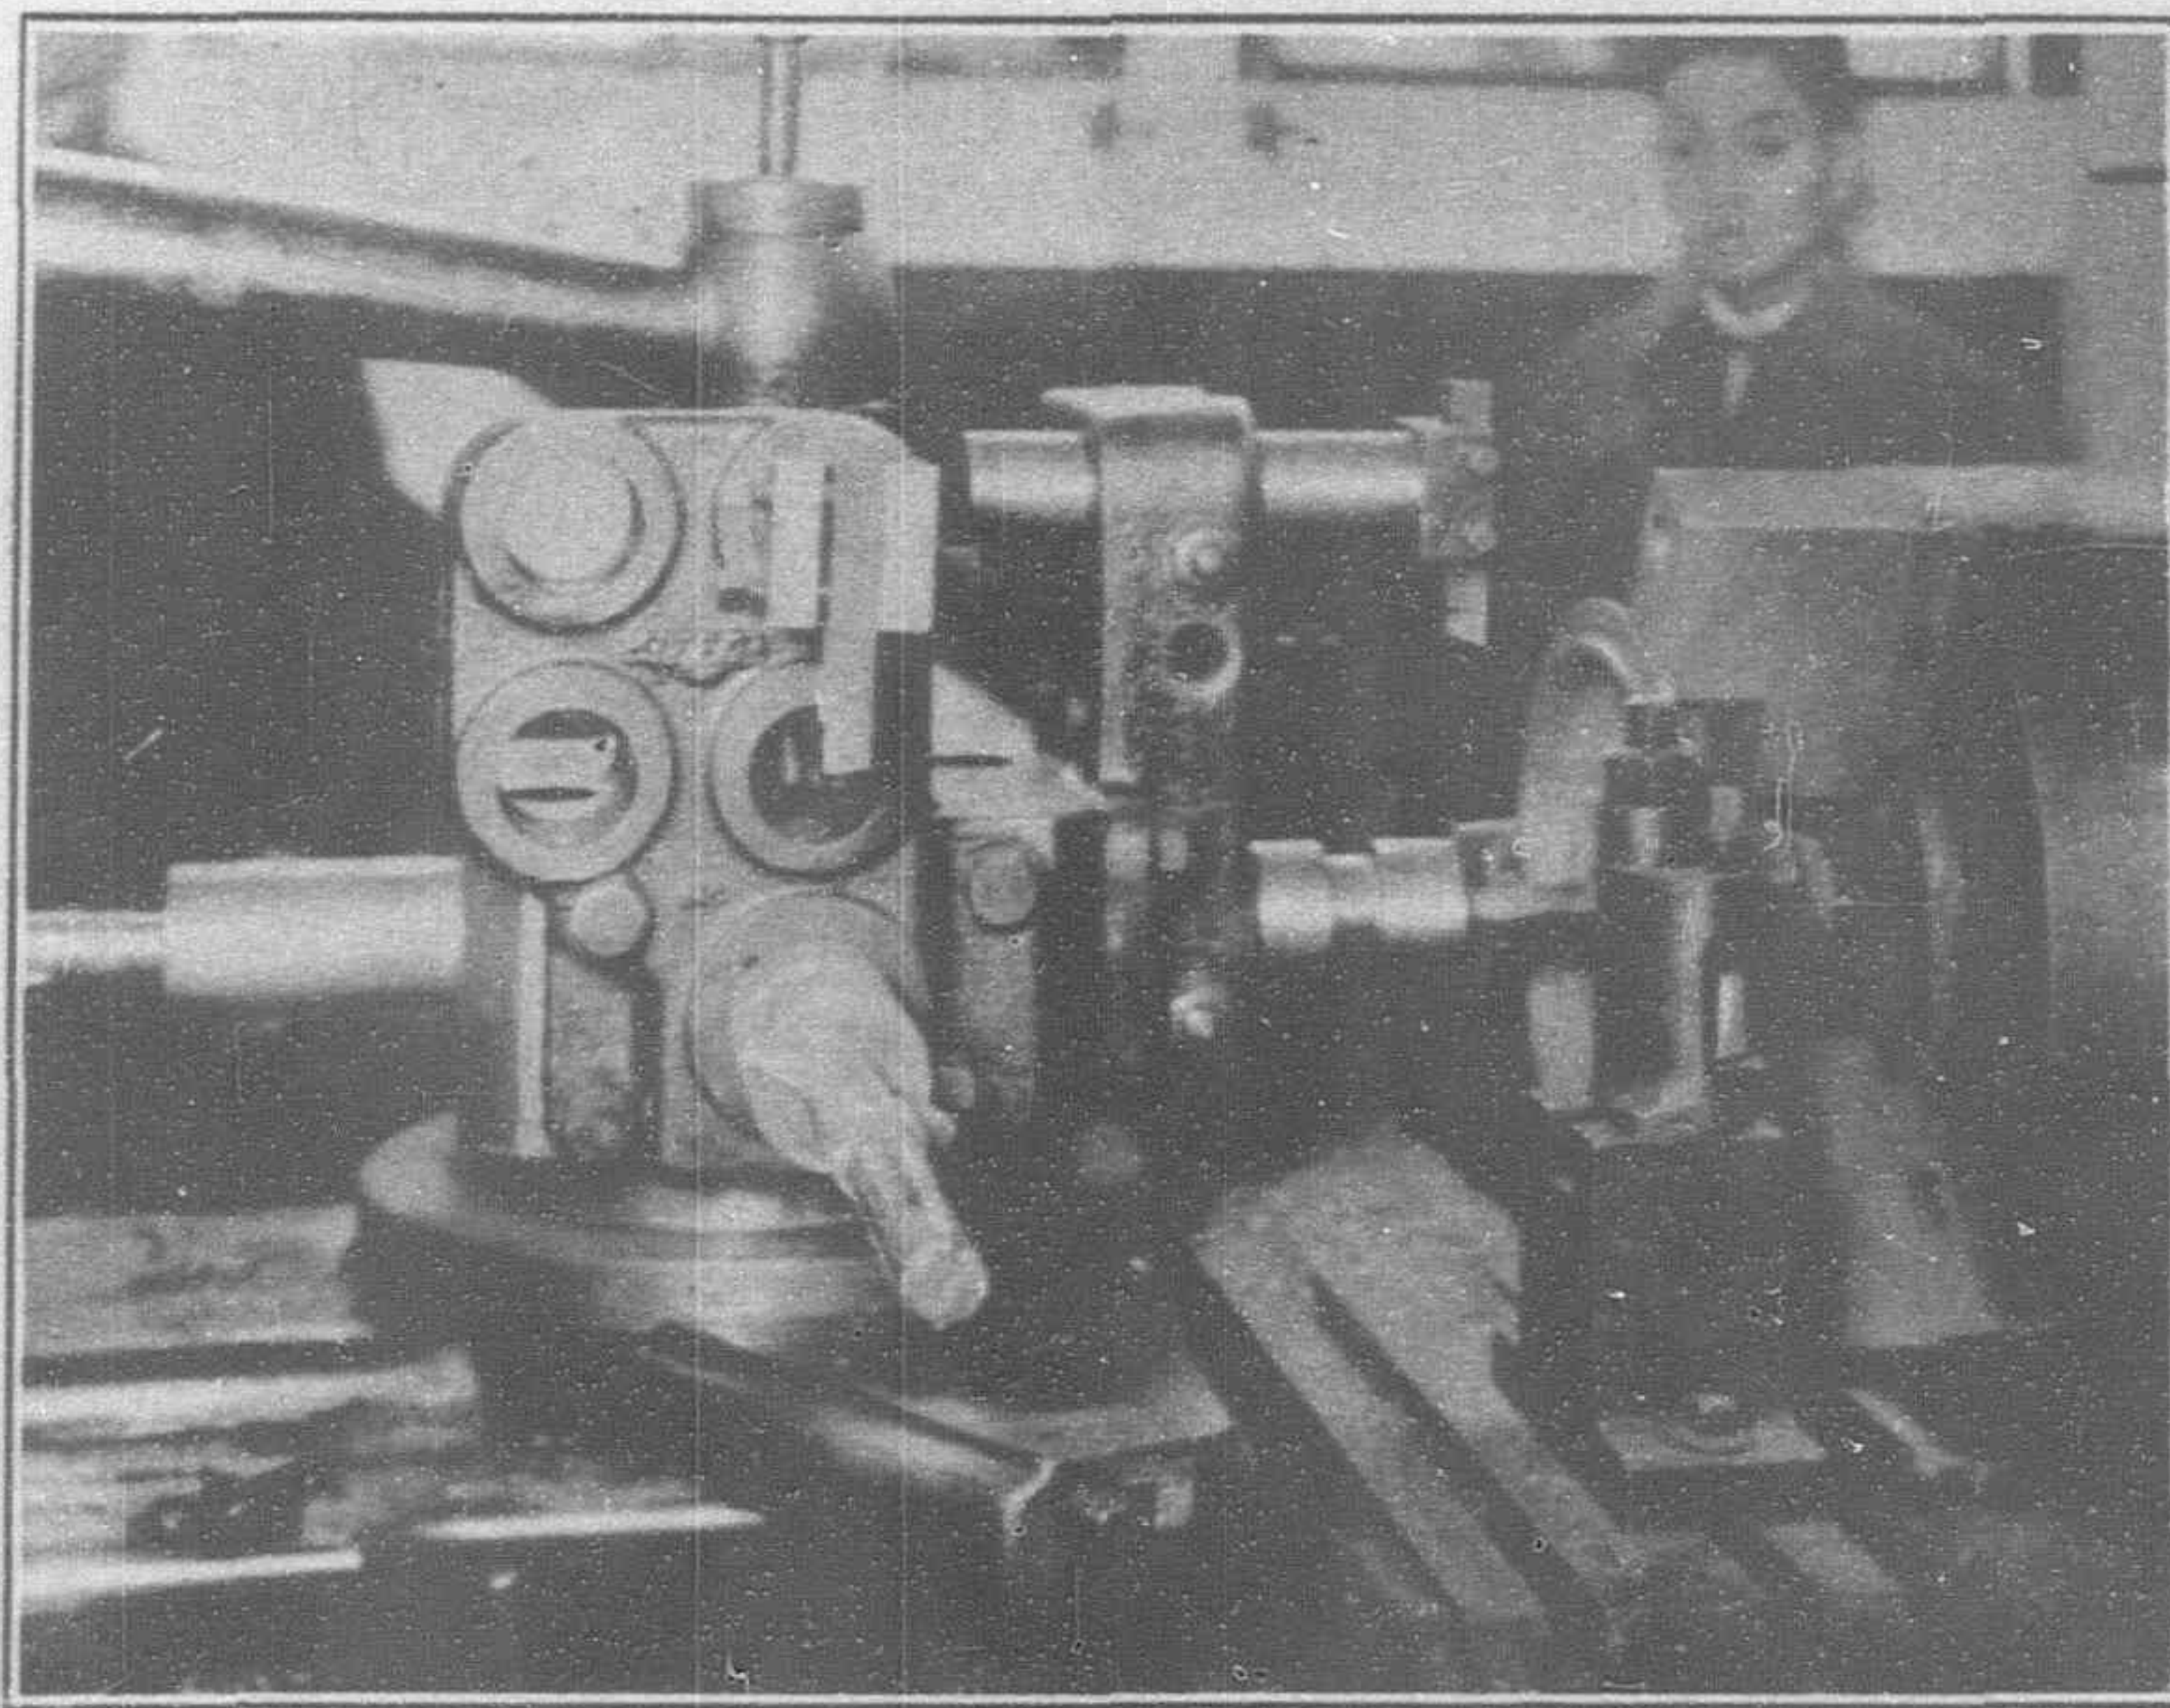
Close up view of same machine, taken at the Machine Tool Exhibition at Osaka
